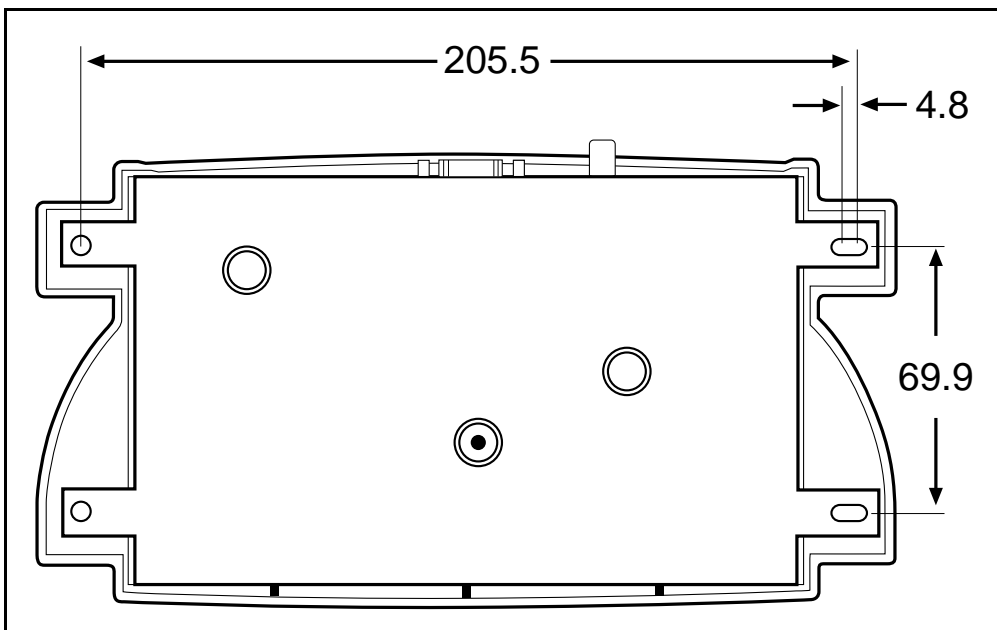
CrossCheck CDPD Mounting Dimensions (in millimeters)
